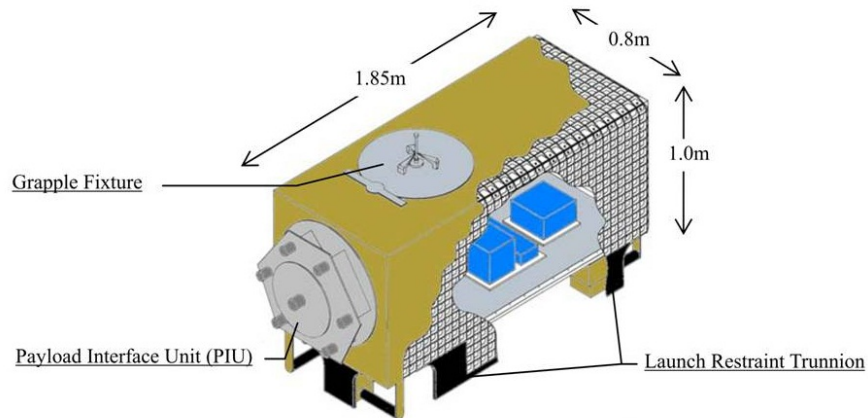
JEM-EF typical payload envelope adapted from “Kibo Handbook” [8:p 4-18]
